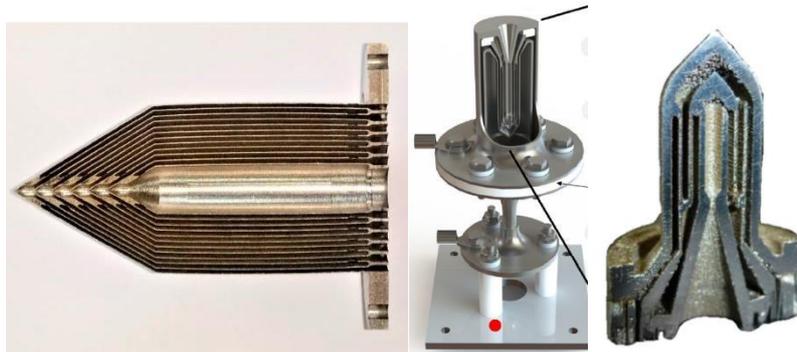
Examples of resistojets manufactured using metal additive manufacturing. a) Inconel heat exchanger (Coral et al., 2021); b) and c) Stainless steel heat exchanger (Romei and Grubišić, 2020).
